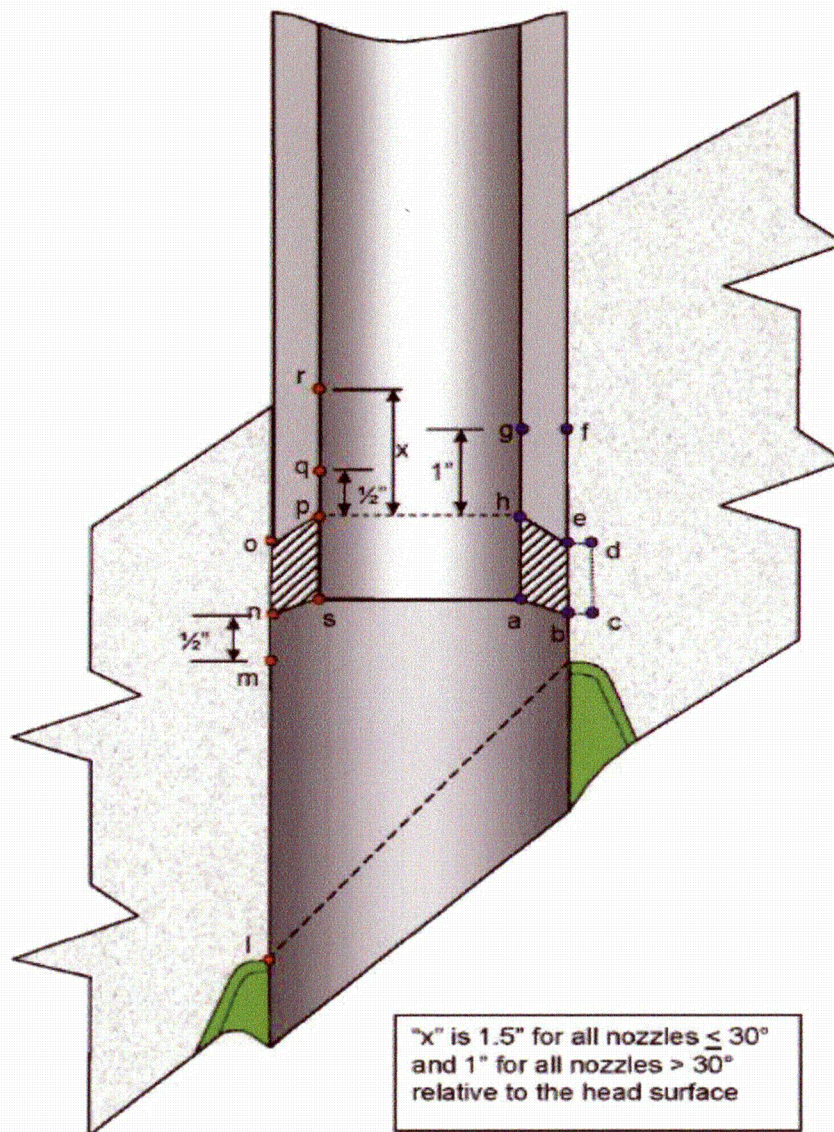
CRDM and RVLIS Nozzle Weld
